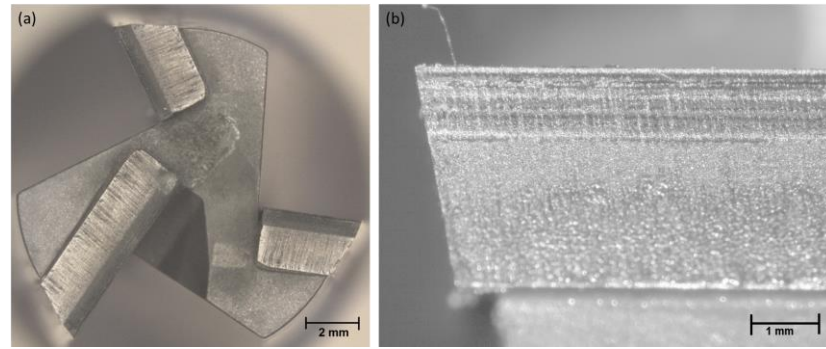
(a) Top and (b) side view of the 10 mm PCD end mill.
